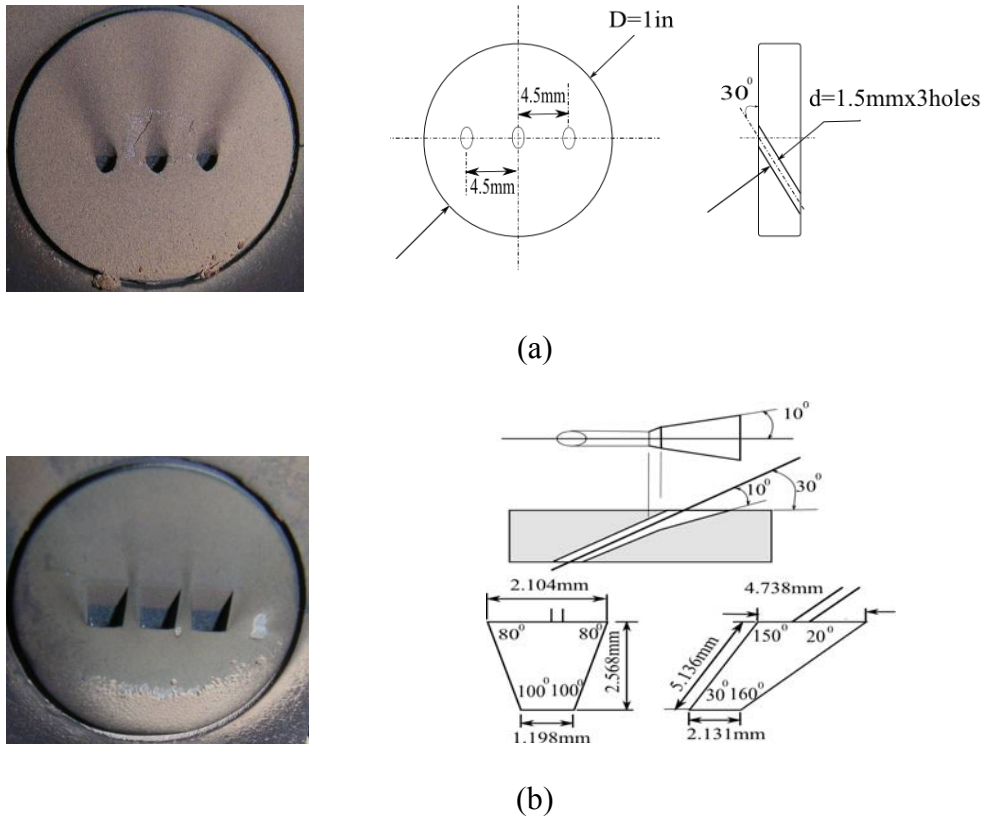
Geometry of coupon with a) cylindrical holes (M1) and b) shaped holes (M2)
